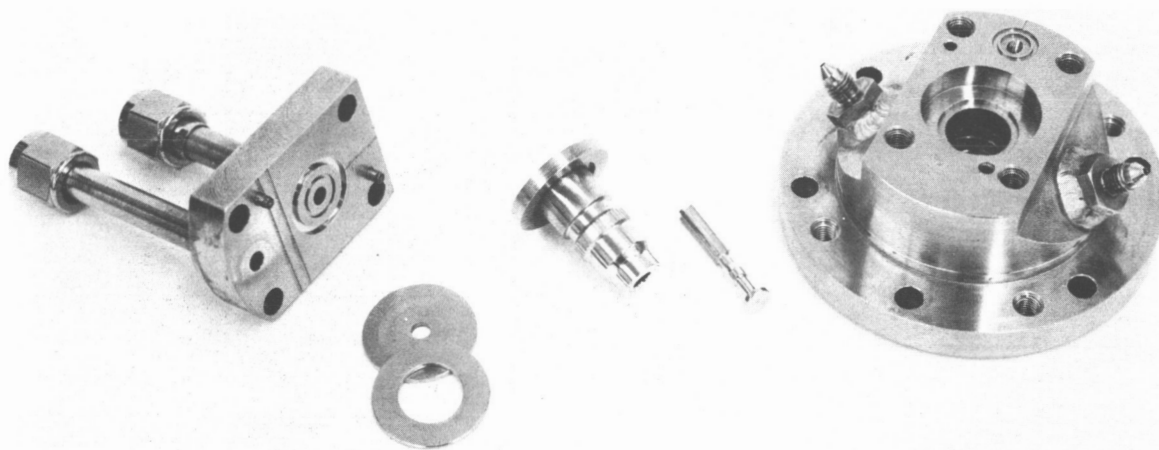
Disassembled View of 100 lbf FLOX/LPG Injector
